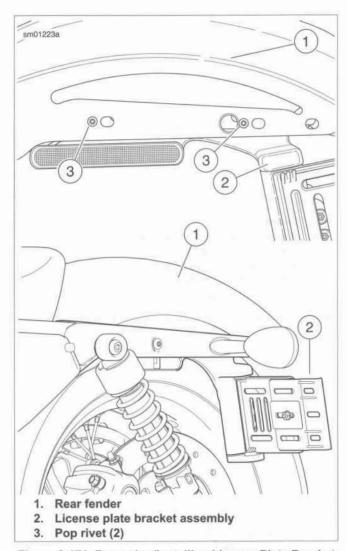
Removing/Installing License Plate Bracket Assembly (US)
